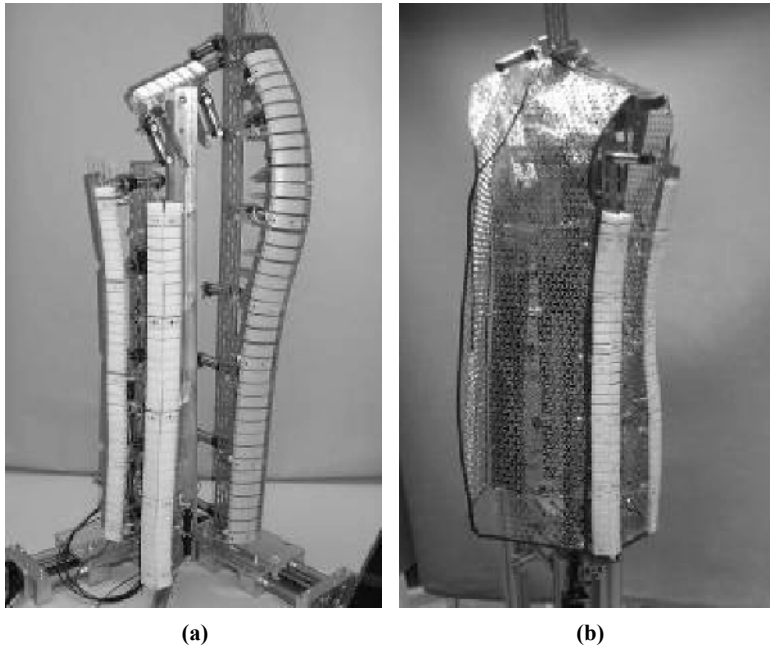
Adjustable 3D mould – prototype versions/photos: Philipp Moll GmbH & Co KG/
